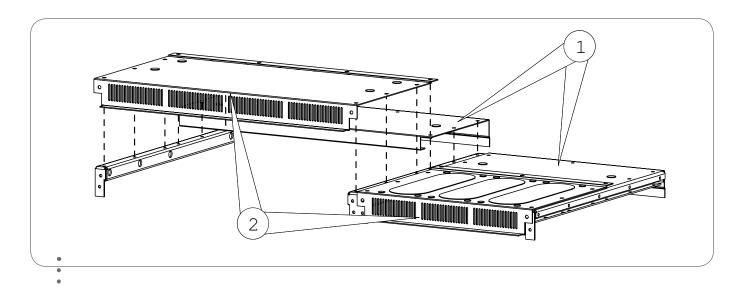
Back roofs are fastened to profiles first and then front roofs.
